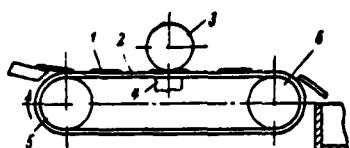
Diagram of machine for deburring plates. 1) Plate; 2) endless rubber belt; 3) abrasive wheel; 4) stop; 5) driving pulley; 6) tensioning pulley.
